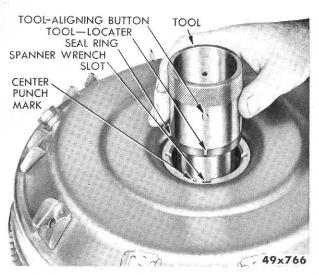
Locating Seal Ring in Seal Housing (Tool SP-791, Part of Tool C-885)
